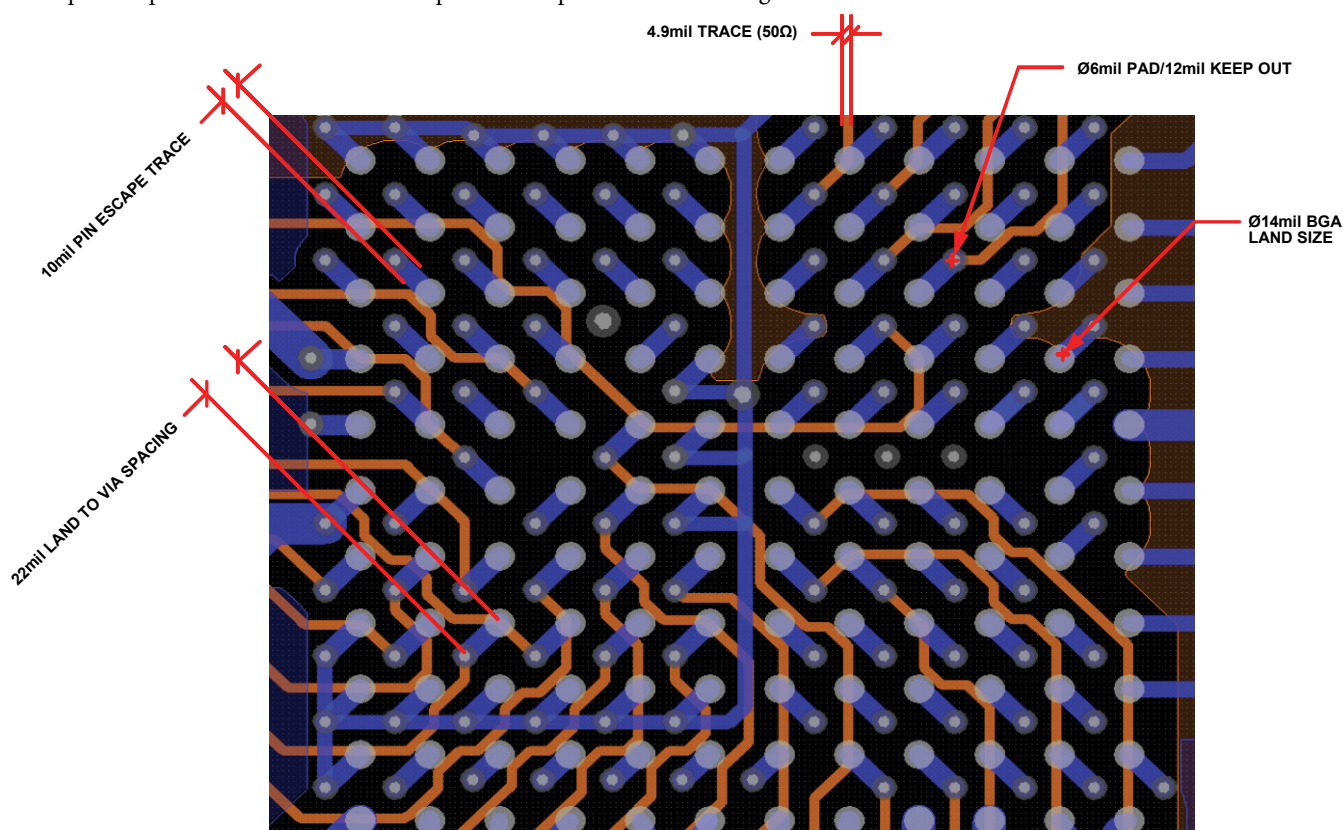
0.8 mm Pitch BGA Via Fan Out
